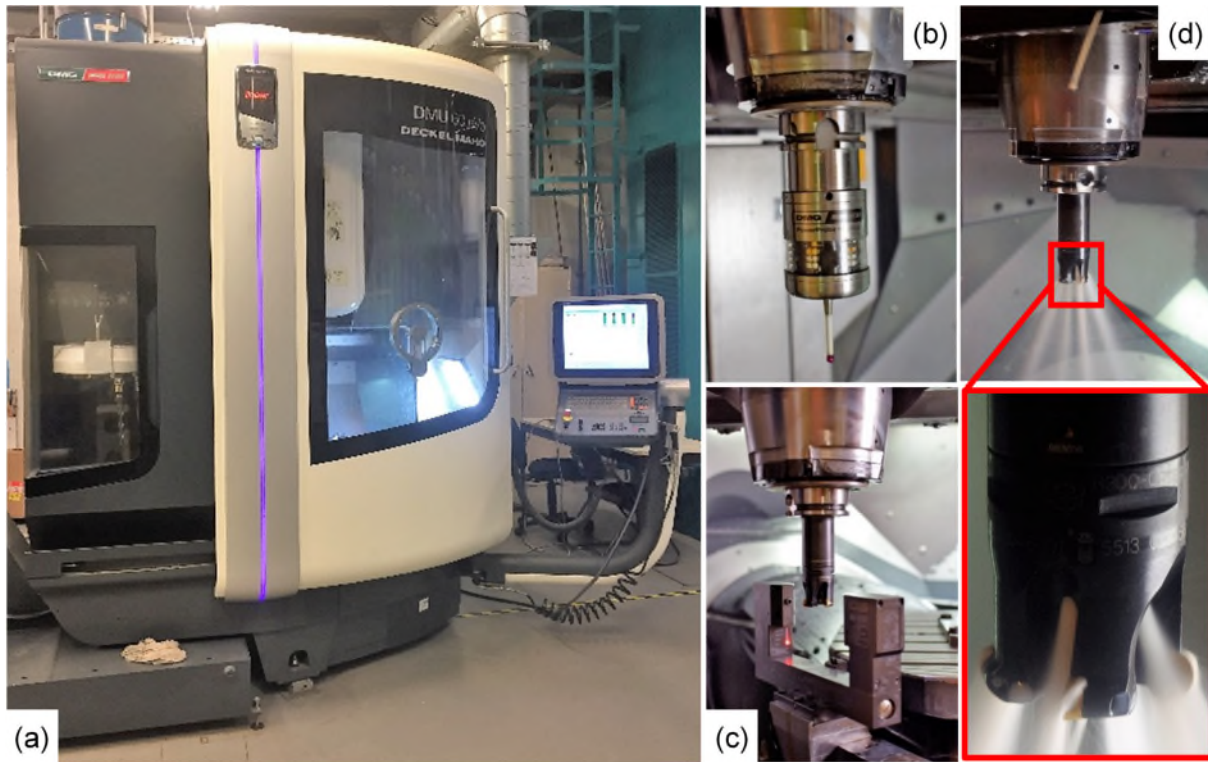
(a) DECKEL-MAHO DMU 60 eVo linear machining centre used for milling tests, (b) Renishaw touch probe device for workpiece measurement, (c) BLUM laser measuring system, and (d) high-pressure internal lubrication system.
